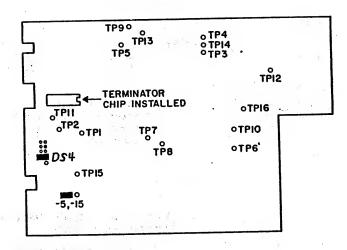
10 MB DISC CONTROLLER PWA Jumper Settings
